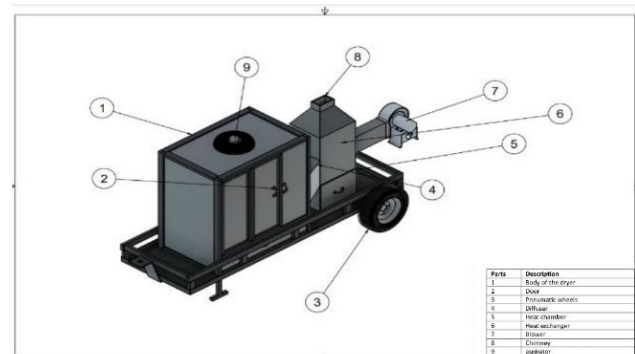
Isometric view of the designed multipurpose cabinet dryer
